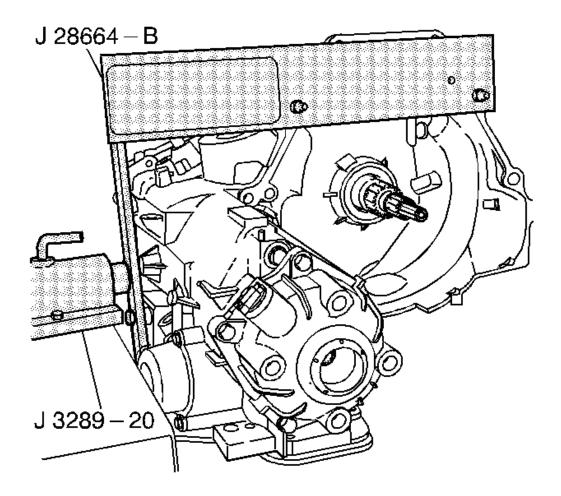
J 28664-B & J 3289-20 Installed Onto Transmission Courtesy of GENERAL MOTORS COMPANY
